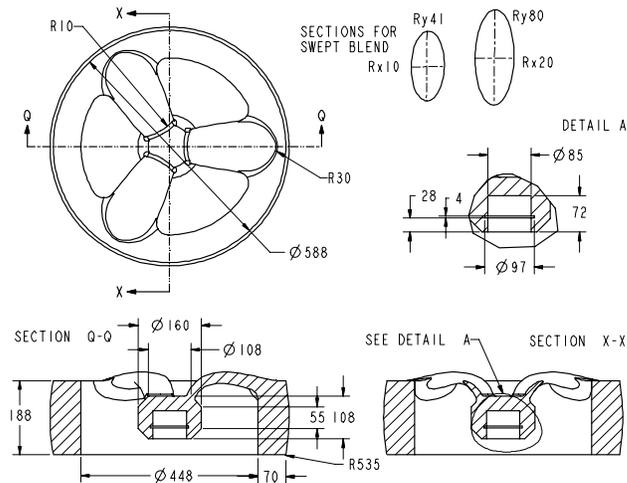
Top view, sectioned front view, sectioned right view, detail view, and two blend sections with dimensions
